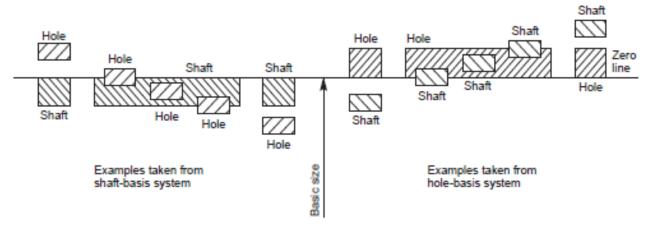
Examples illustrating shaft basis and hole basis systems
